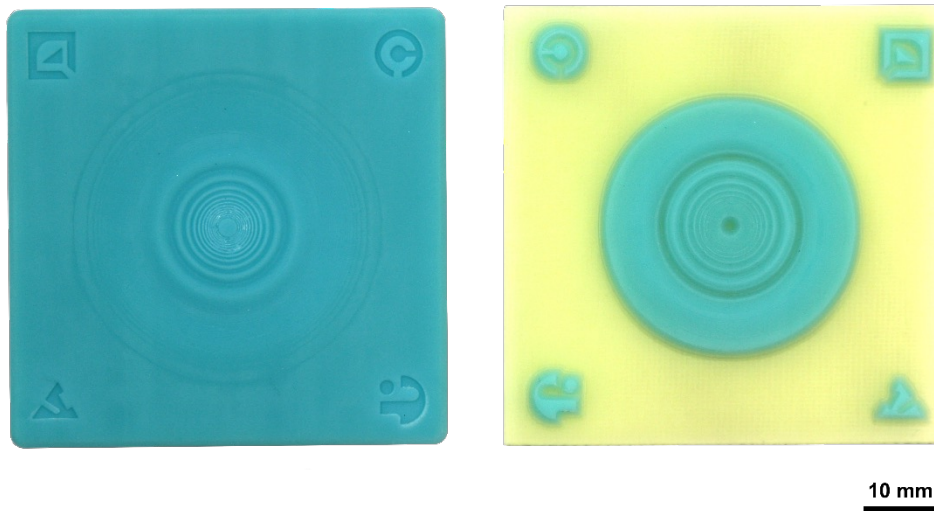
Photograph of the universal embossing test tool, the female die is displayed on the left and the male die on the right; while the female die was entirely additively manufactured using MSLA stereolithography, the embossing relief of the male die was printed via MSLA onto a sheet of fiberglass
